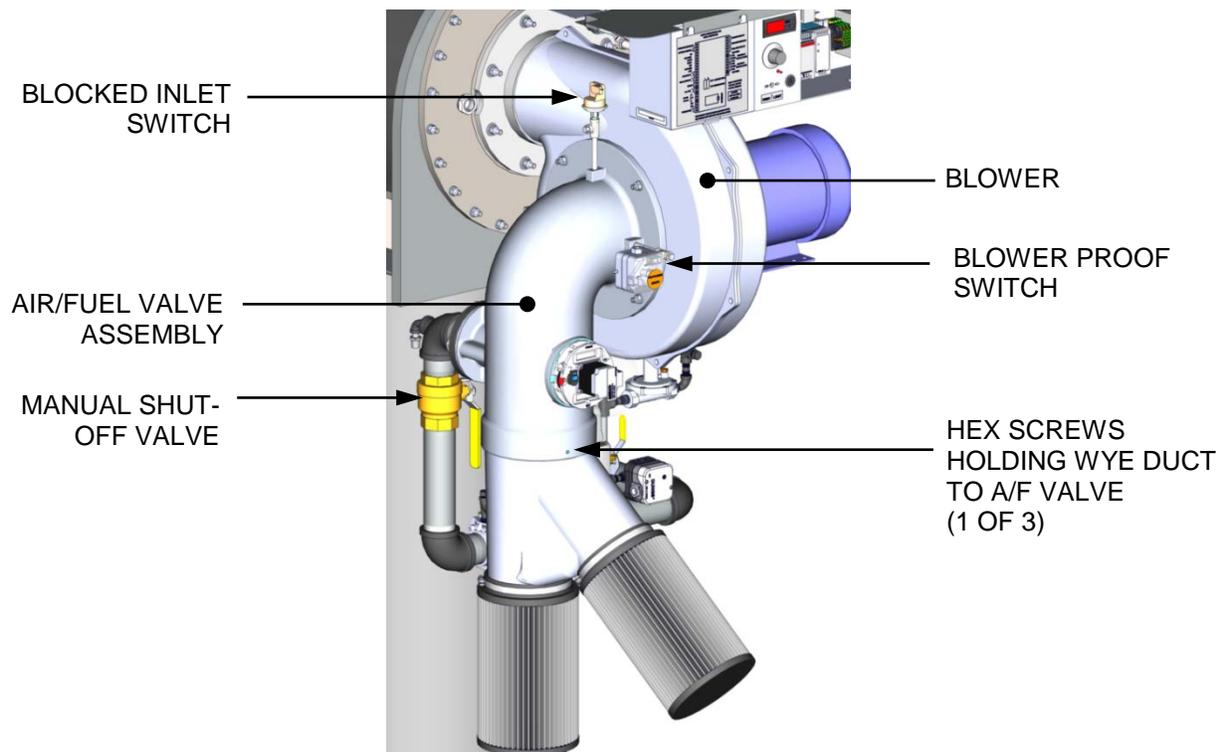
Blower Proof Switch & Blocked Inlet Switch Locations
